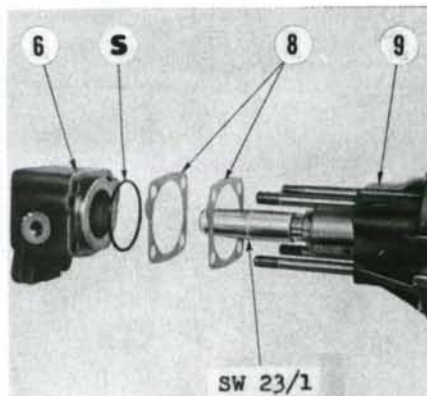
Oil seal protector sleeve (SW 23/1 or FT.3147) should be used as shown. Refer to Fig. 9 for parts identification except for "O" ring seal (S).
